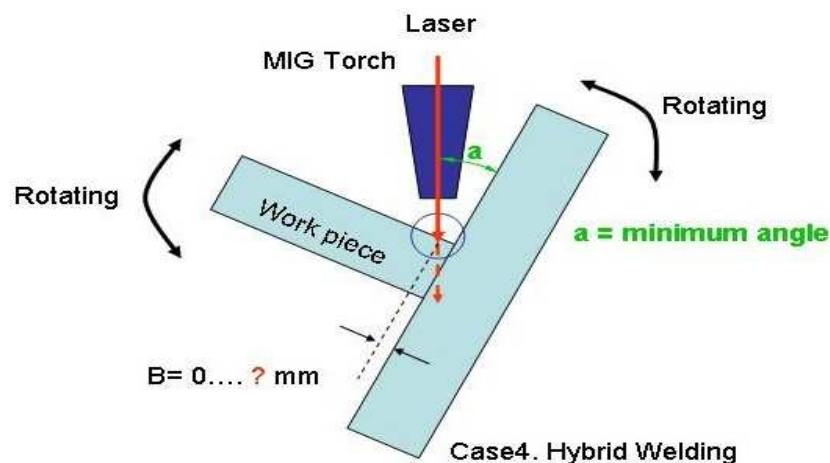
6 Principle of experimental set-up for welding process
